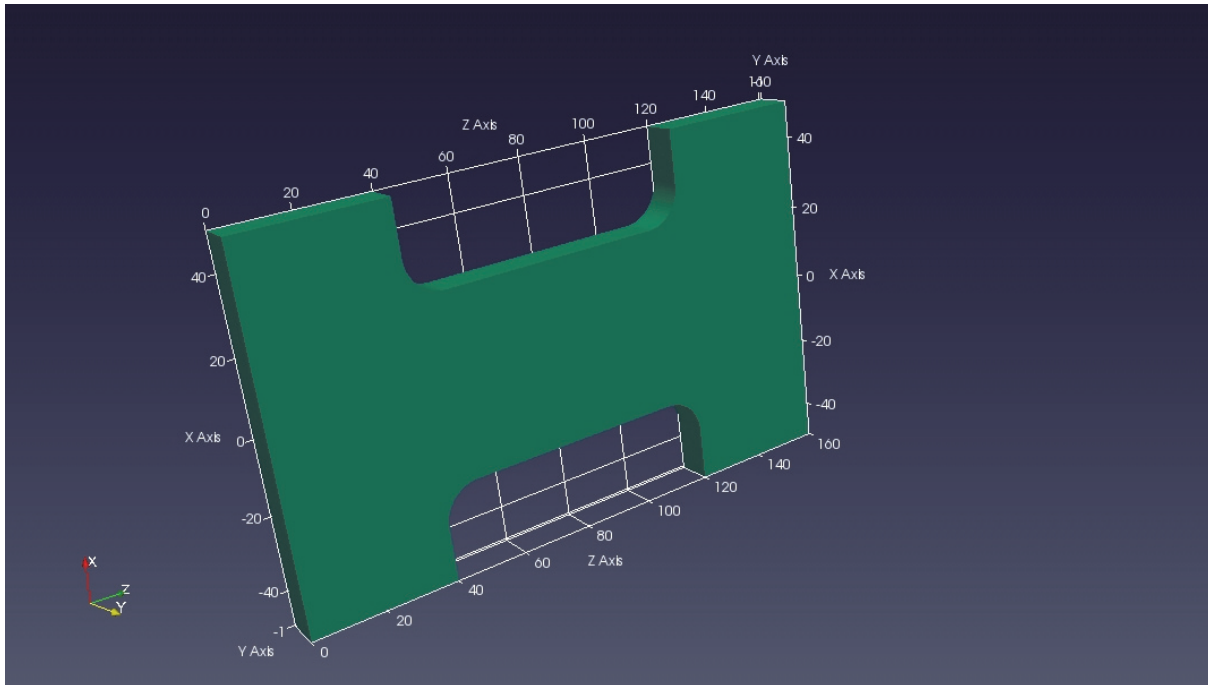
Geometry of tensile test specimen. (Dimensions are in mm.)
